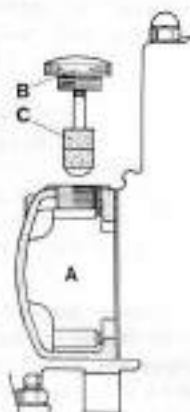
Cross-sectional view of ether starting aid plug in diesel intake manifold. Plastic plug (B) has felt (C) which is suspended in intake manifold cavity (A); refer to paragraph 106.
